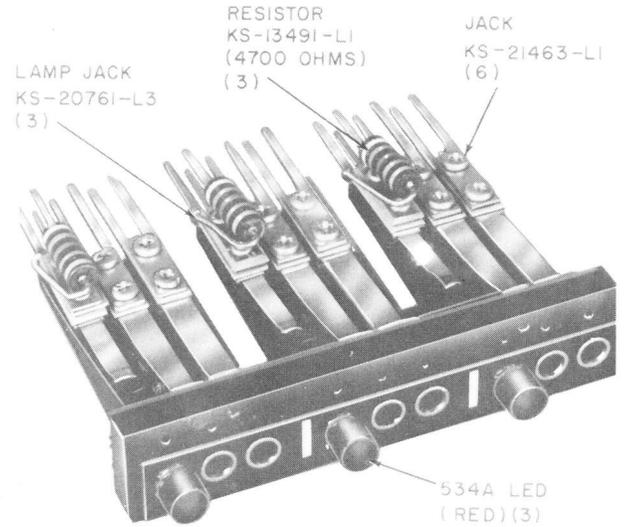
KS-21315 L6 Monitoring Insert Assembly Containing Three Fully Equipped Channels
